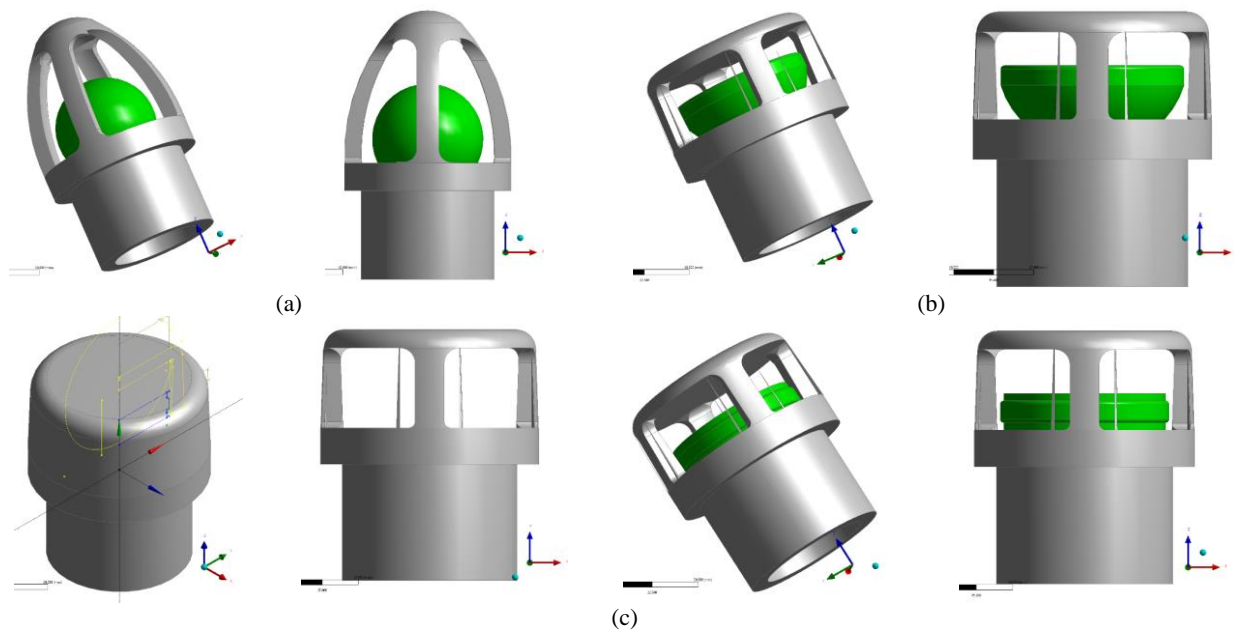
The designed prosthetic artificial mechanical heart valve; (a) the designed conical caged ball valve; (b); the single hemispherical caged ball valve (c) the single-leaflet valve
